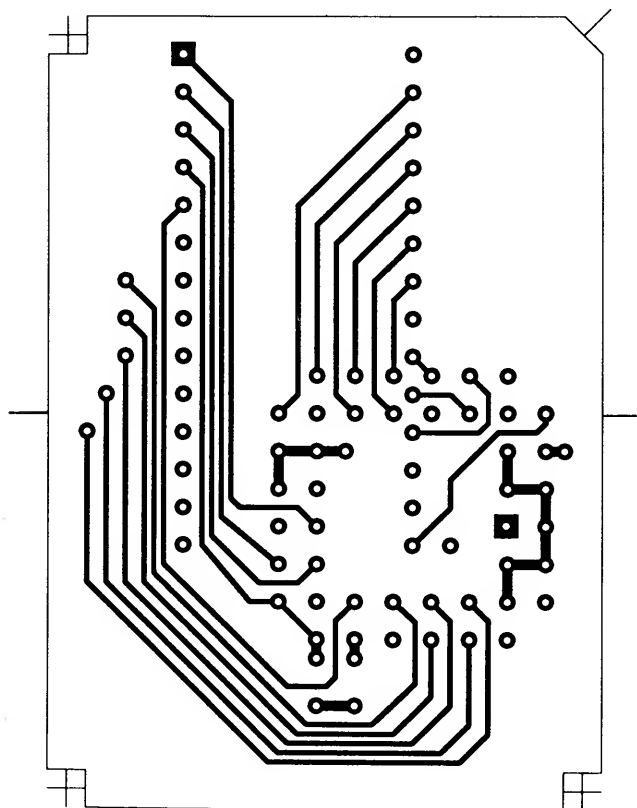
PCB Component Side Layout Pattern Using Socket Mounted PLCC
